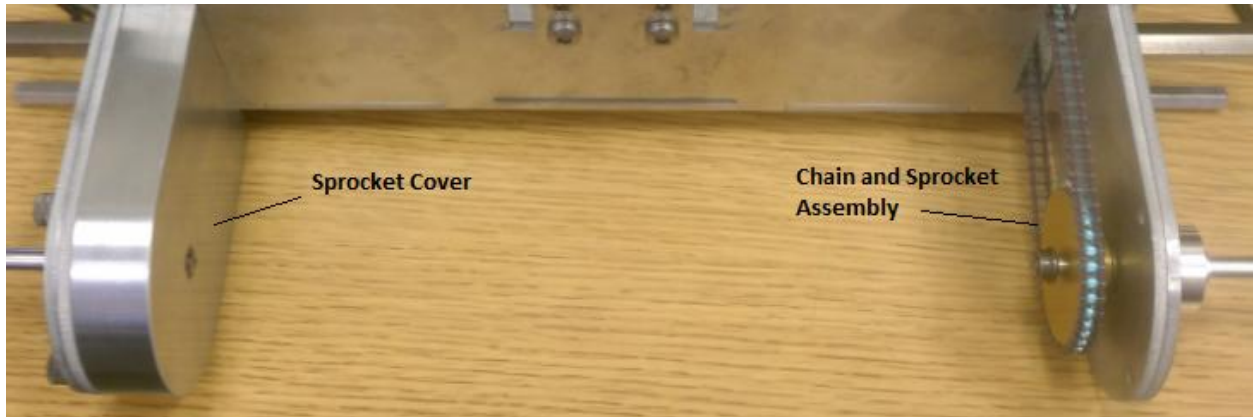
Shown is the cover used to prevent exposure of the chain and sprocket assembly.
